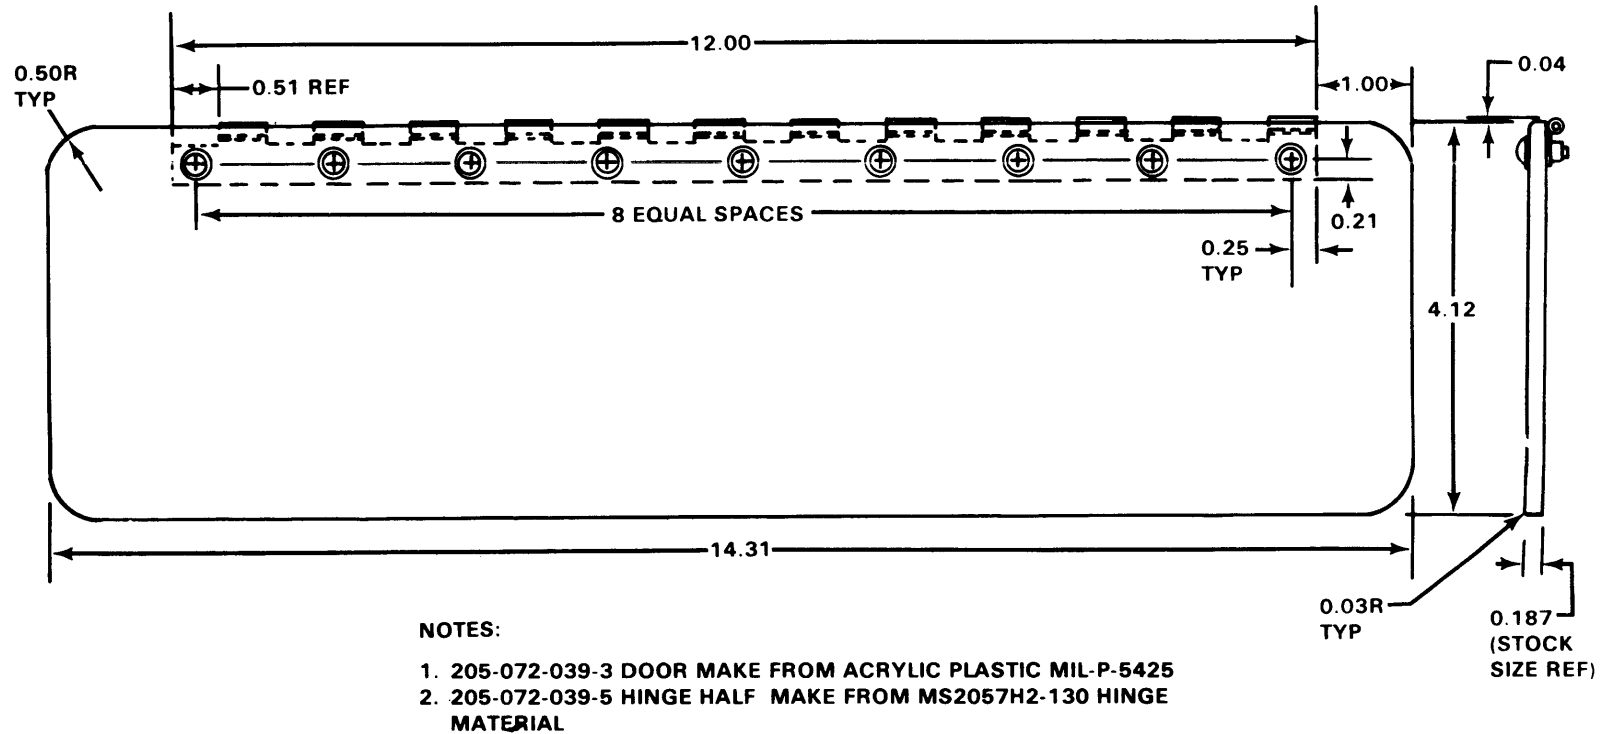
Part Number 205-072-039-1 DOOR, Assy Of
